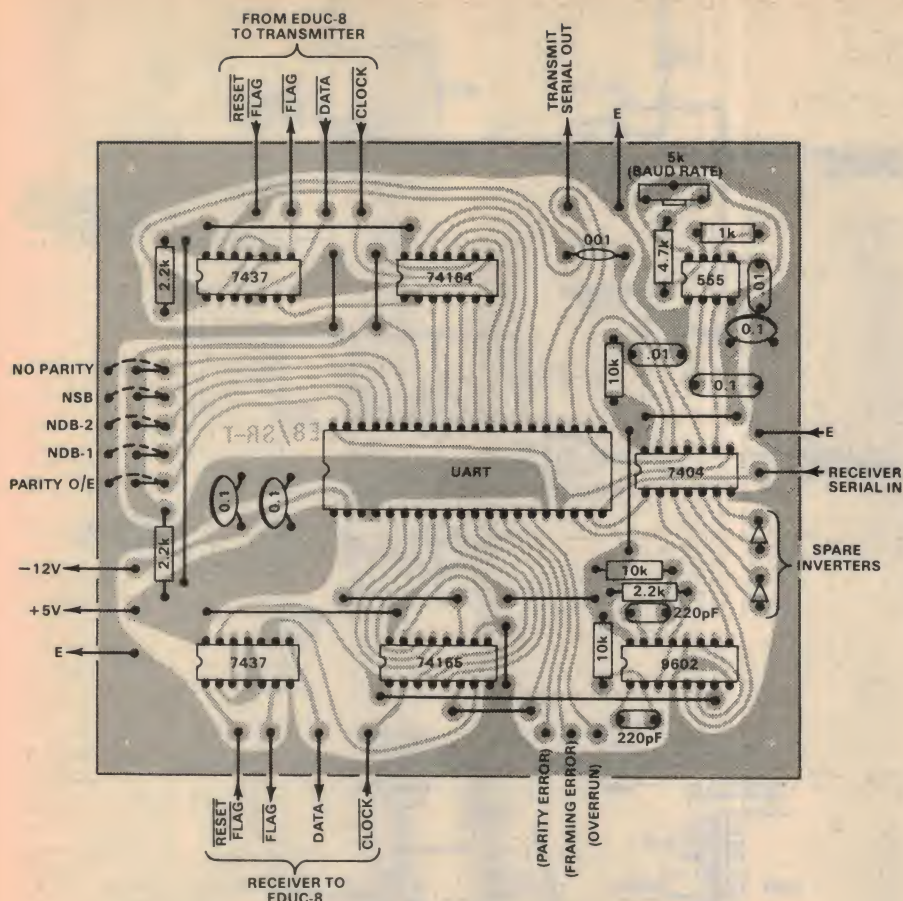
ASYNCHRONOUS INTERFACE PCB WIRING
